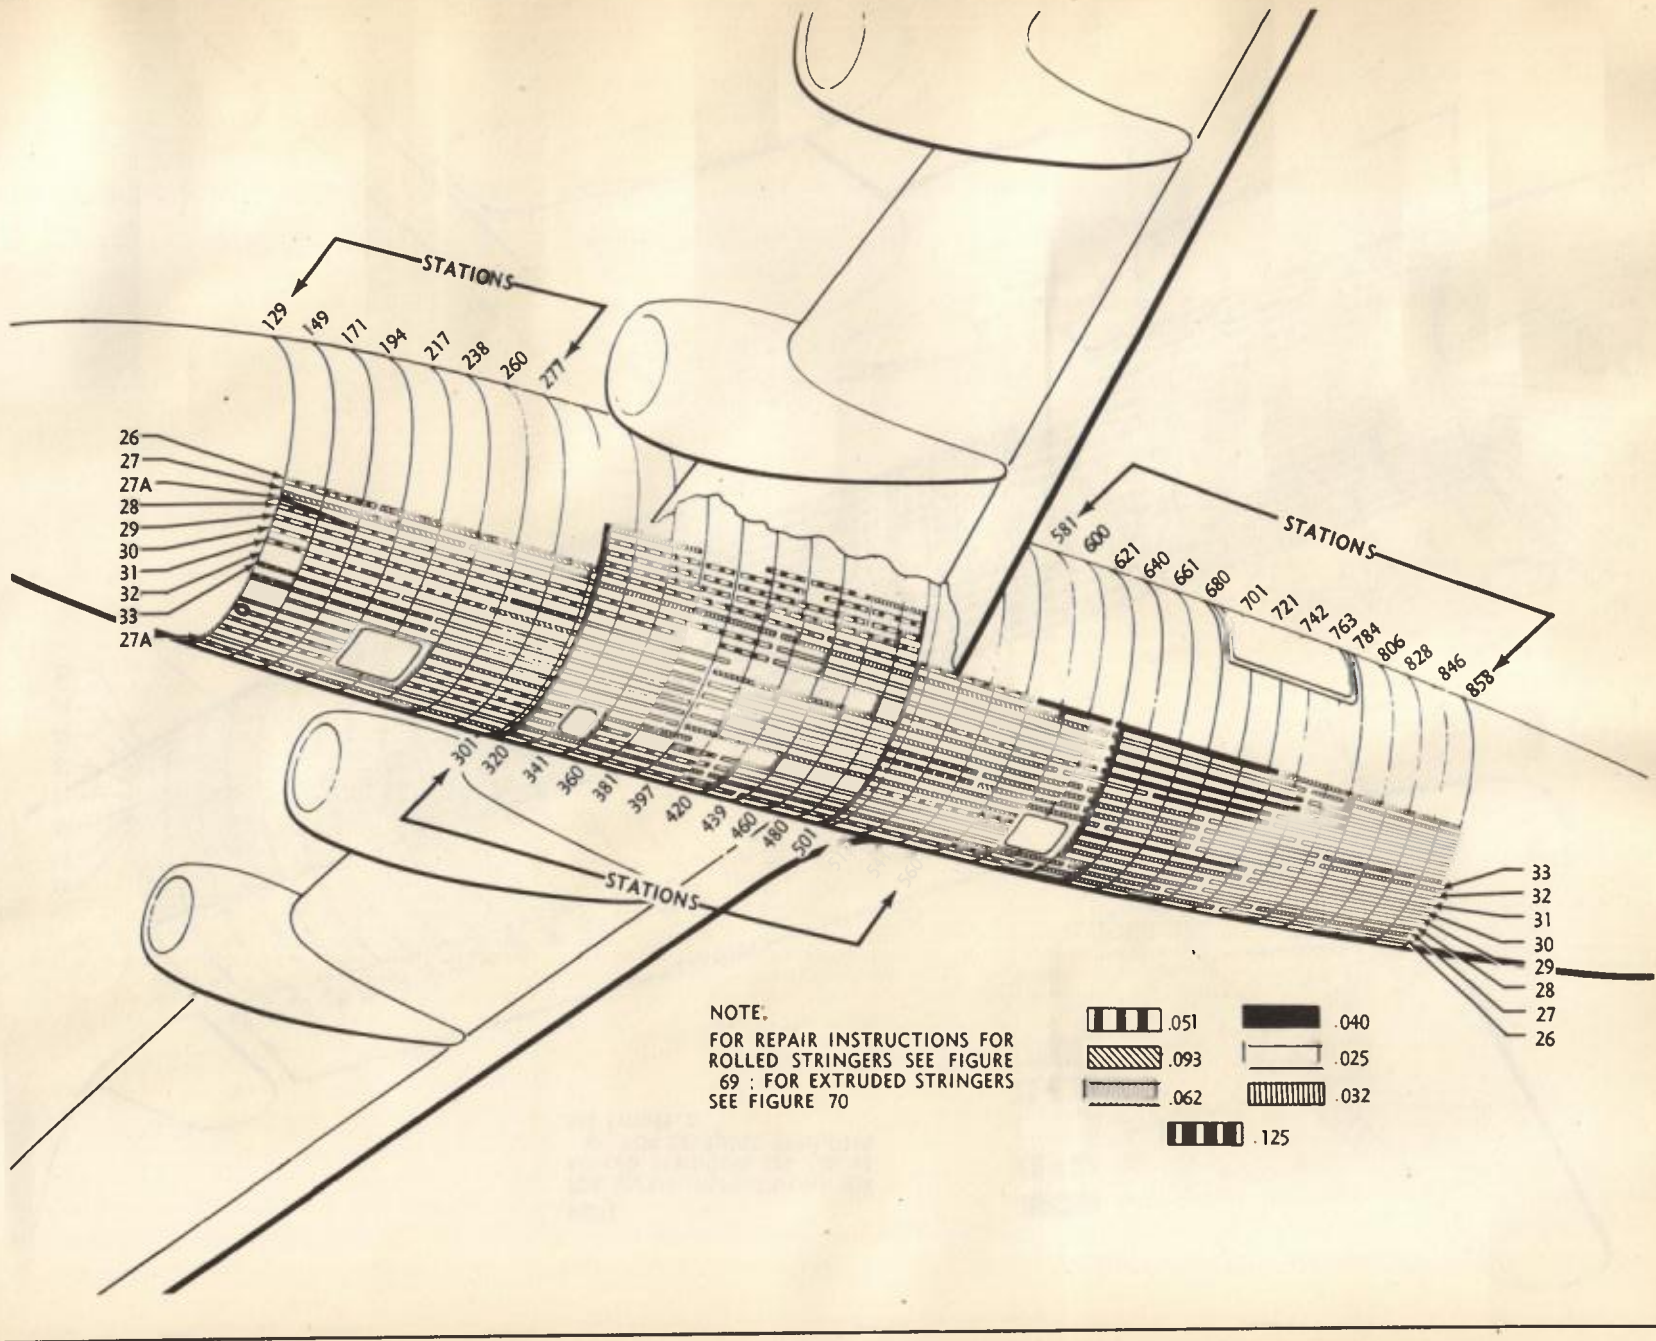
Fuselage Stringers — Center Section — Lower Surface
